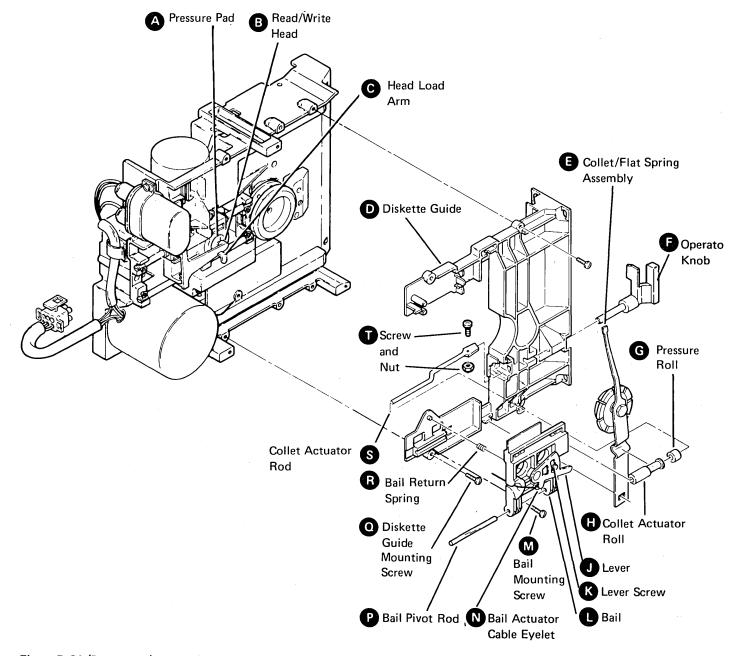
(Part 1 of 2). Collet/Flat Spring Removal
